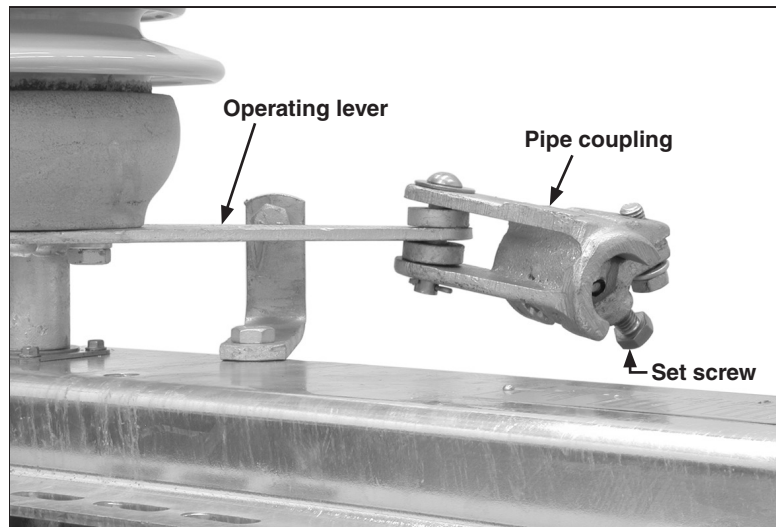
Assemble the pipe coupling to the operating lever—interphase pipe on one side of operating lever.
